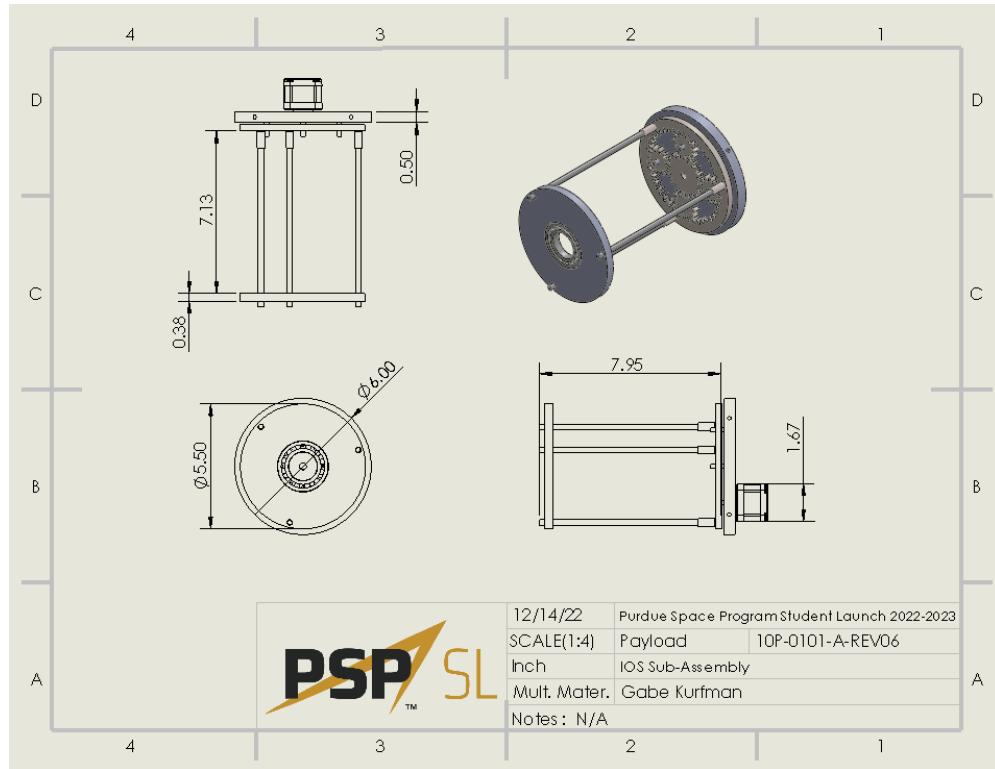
IOS Sub-Assembly Technical Drawing
